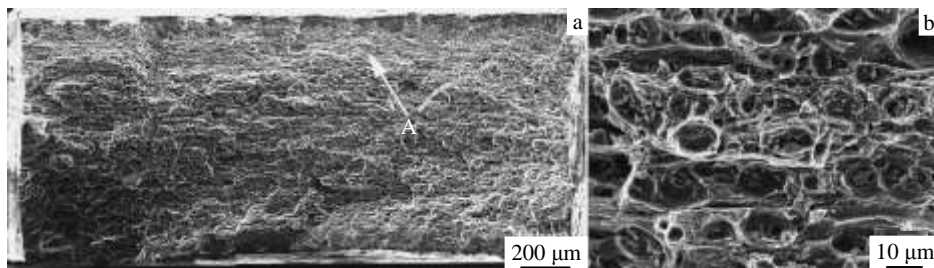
Fatigue fracture micrographs of base metal of 7075-T6 aluminum alloy
